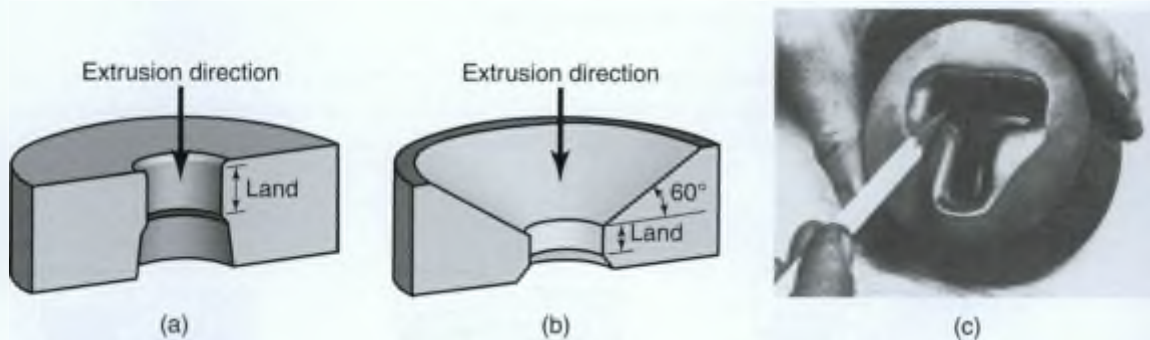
Typical extrusion die shapes: (a) die for nonferrous metals; (b) die for ferrous metals; and (c) die for a T-shaped extrusion made of hot-work die steel and used with molten glass as a lubricant. Source: (c) Courtesy of LTV Steel Company.
